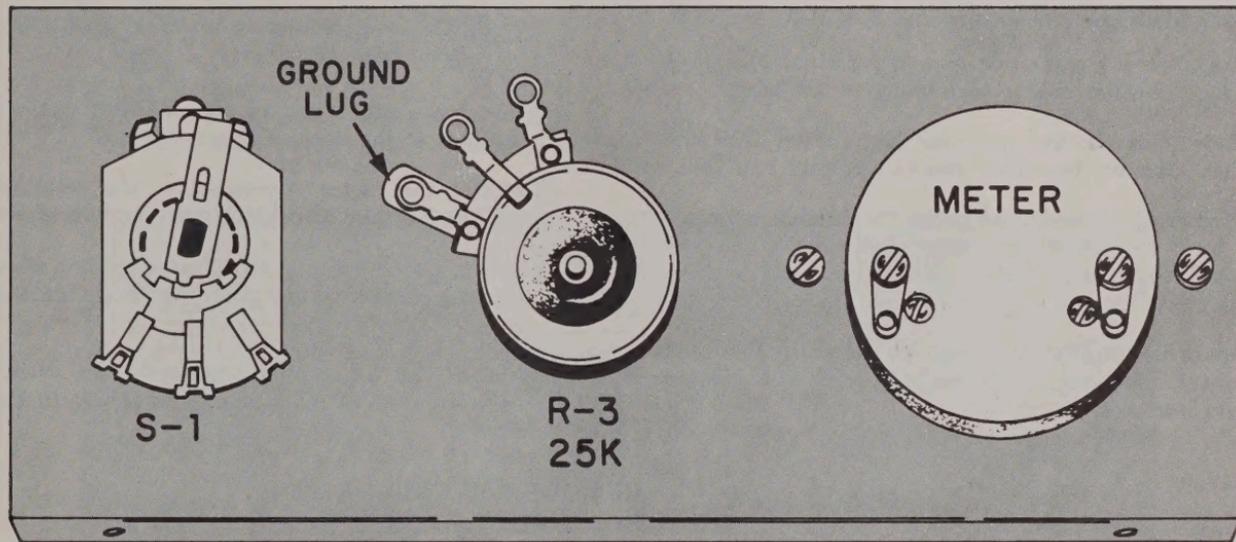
MOUNTING PARTS ON THE METER SUB-PANEL
